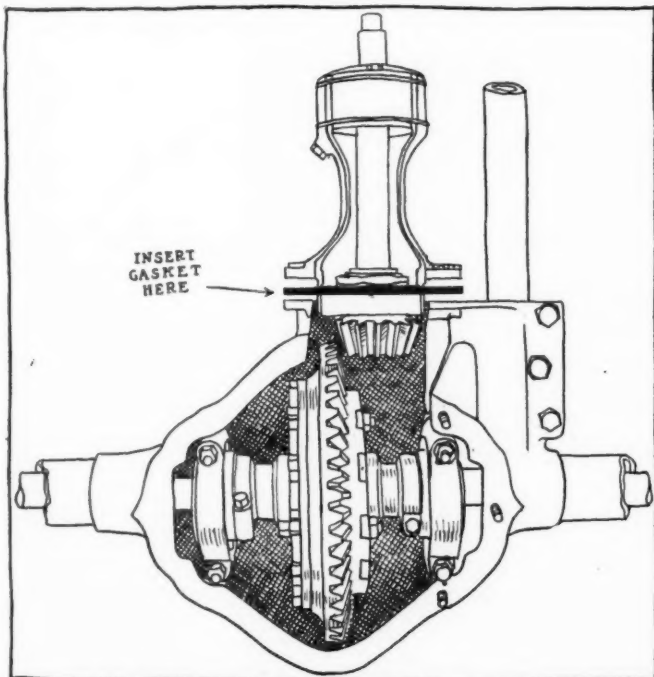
Where the gasket should be inserted to bring gears into mesh
